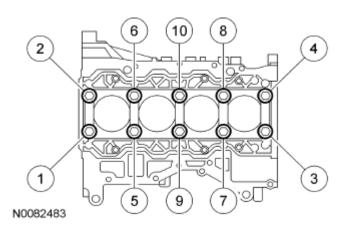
Locating Main Bearing Bolts Removal Sequence Courtesy of FORD MOTOR CO.
